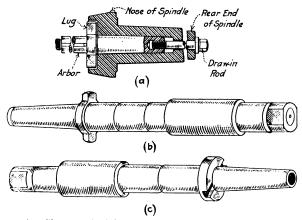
(a) Shows principle of draw-in rod (Brown and Sharpe); (b)
